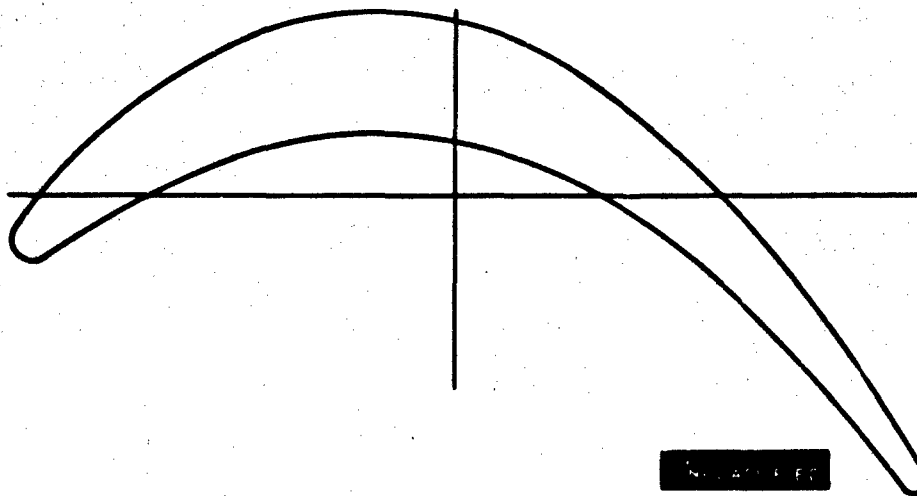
Section B-B, Second Blade 1/4 Root, Planar
